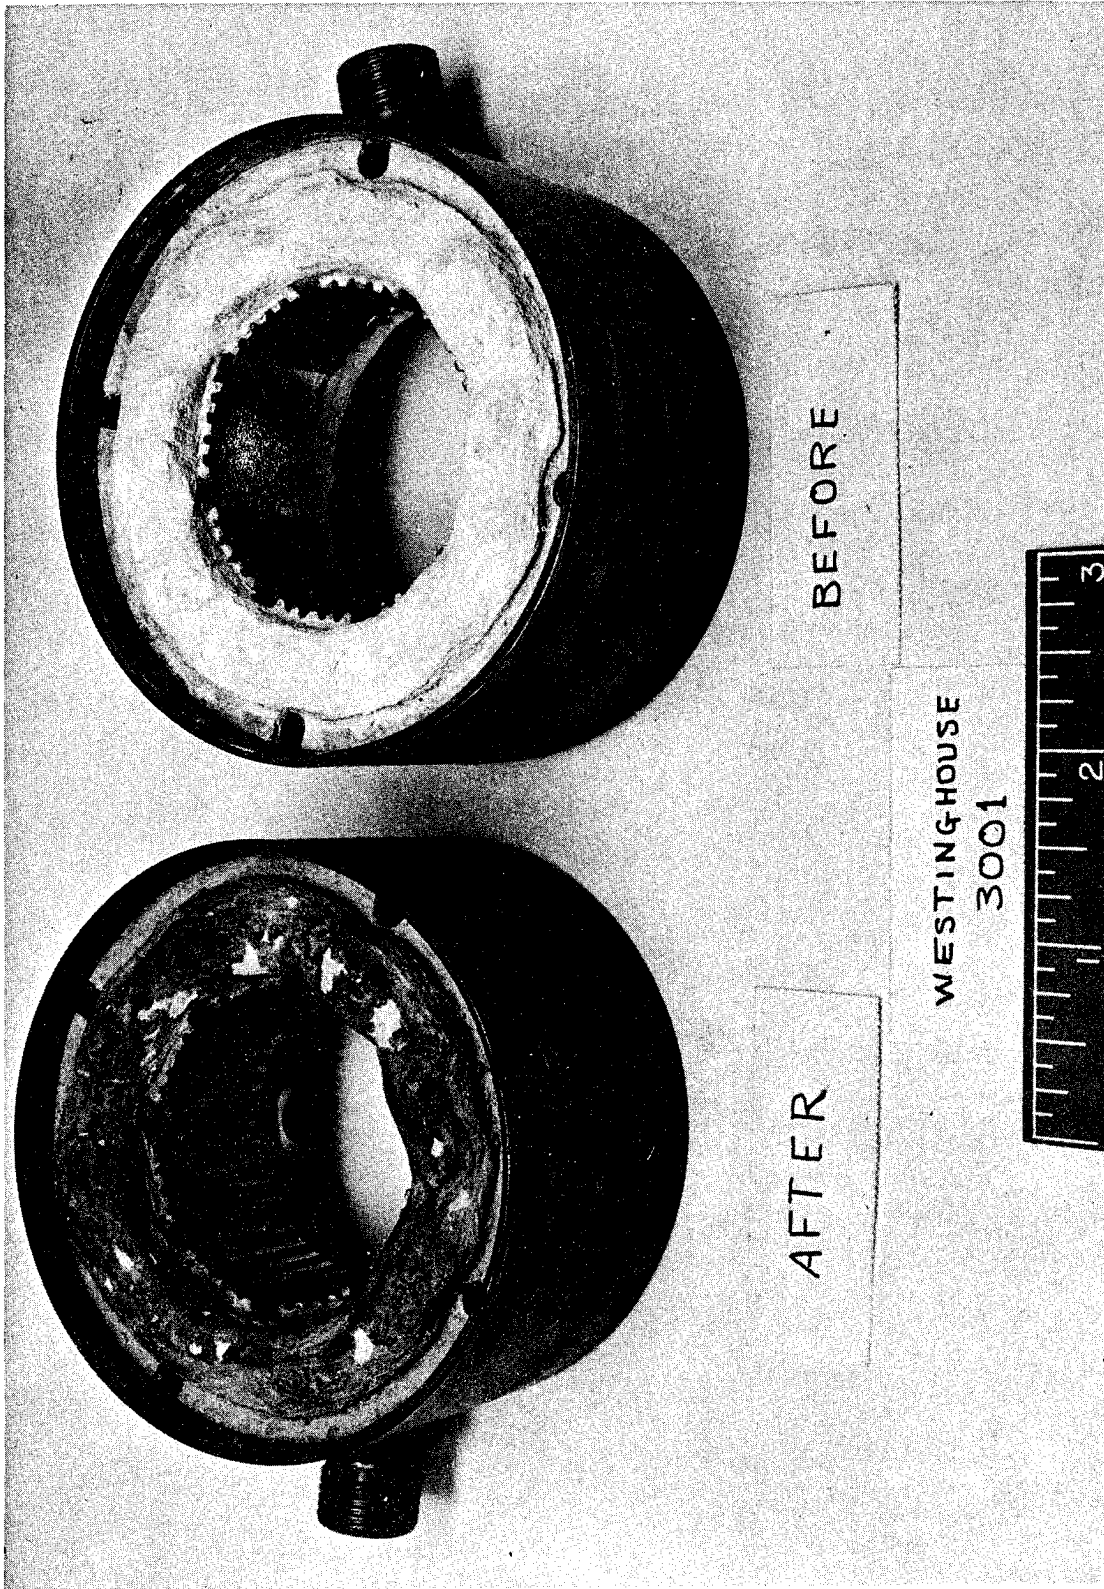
Test Stators Before and After 3000-hr Vacuum-Temperature Test
